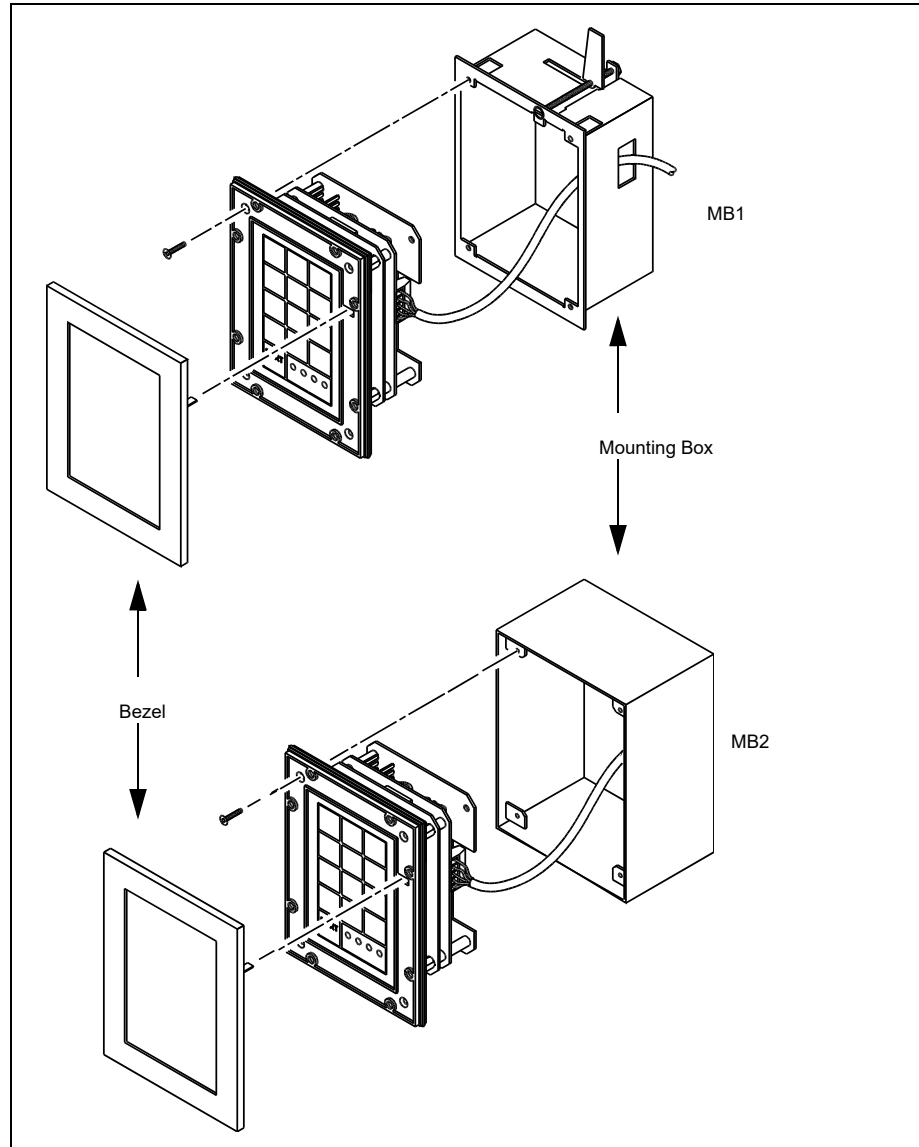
Mounting the ScramblePad Examples (MB1 and MB2)
